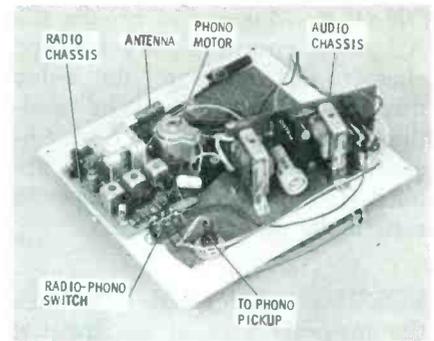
Bottom view of motorboard, Rockland transistorized radio-phonograph.
